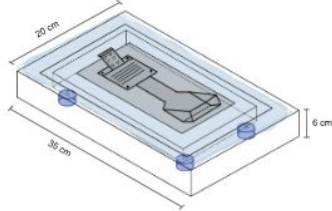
Sketch of Bearing-Guided Force Plate Design.
